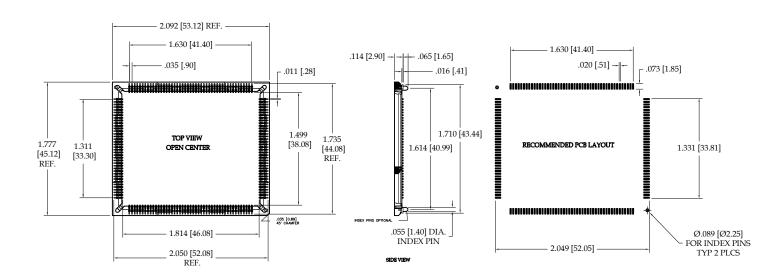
170 Pins Surface Mount: 662-170-SM-G10-R27-L14-1
